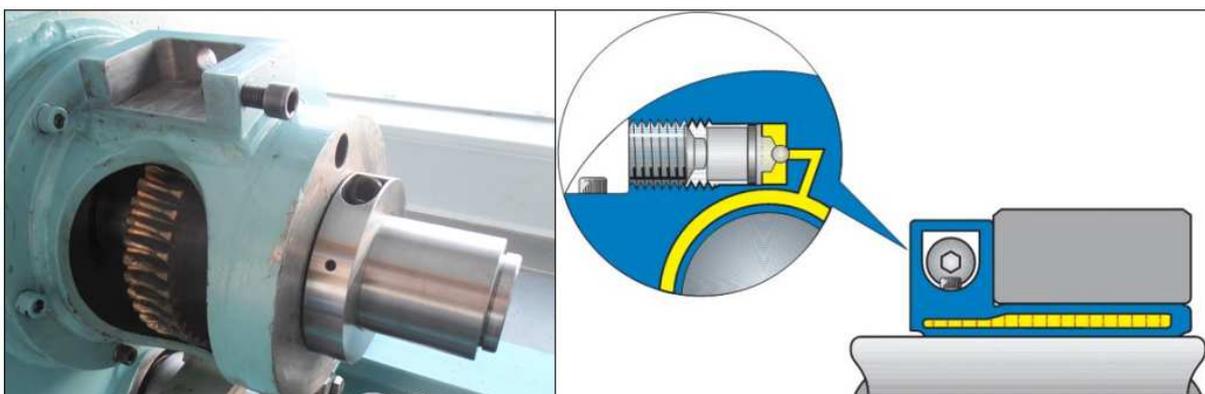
Appearance and principle of the friction clutch as pretensioning mechanism.
